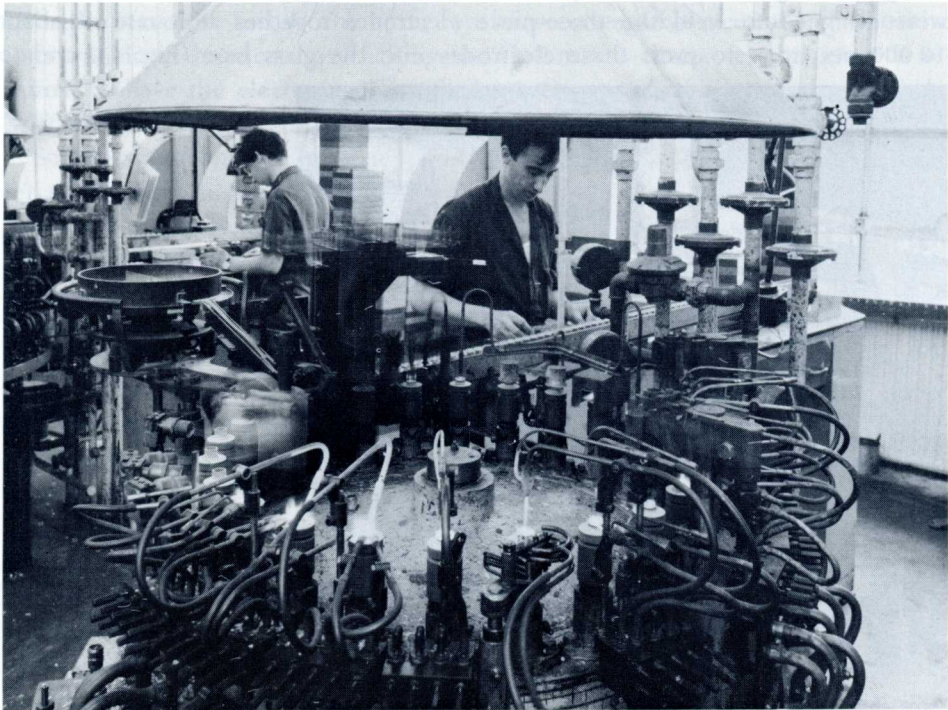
Automatic machine for pressing the tube bases of noval tubes.
